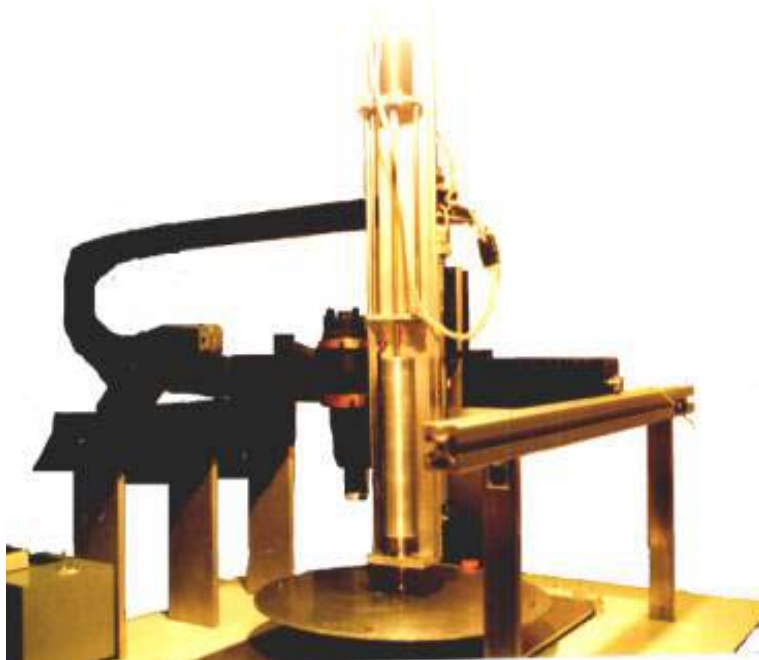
Side view of CC machine used for the production of cylindrical parts with clay/plaster
